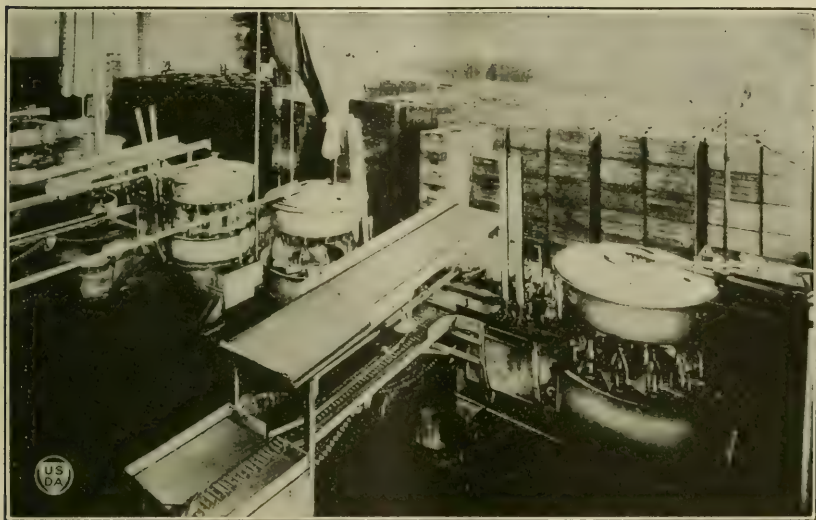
A battery of rotary automatic fillers and cappers, with special conveyer system which reduced the number of men required to operate the machines.
